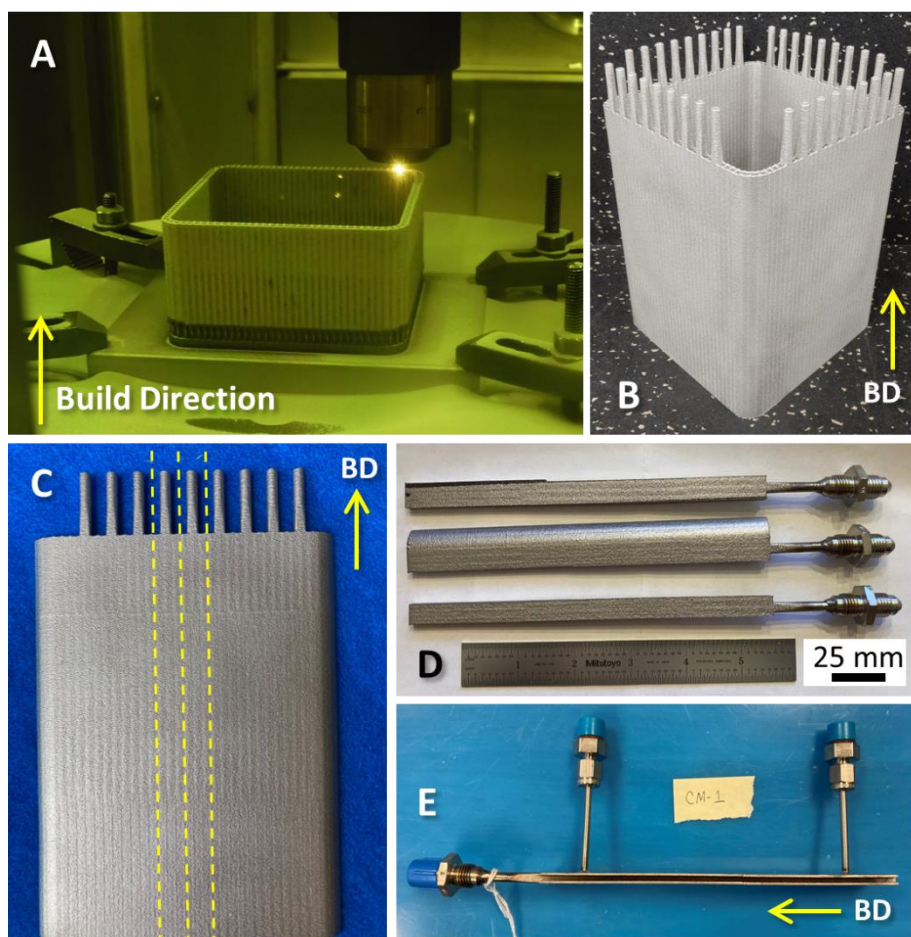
Channel specimen fabrication: A) LP-DED of channel sample boxes, B) complete NASA HR-1 box after stress relief and sectioning from the build plate, C) Panels excised from boxes, D) Individual channel samples with welded inlet port, and E) drilled and welded instrumentation ports. Build Direction (BD) shown with arrow.
